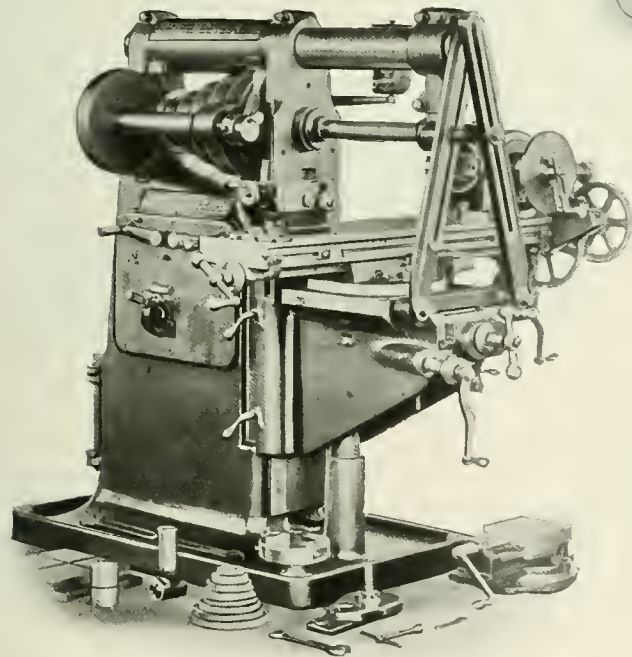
Modern Cone-driven Milling Machine built by the Cincinnati Milling Machine Co.
